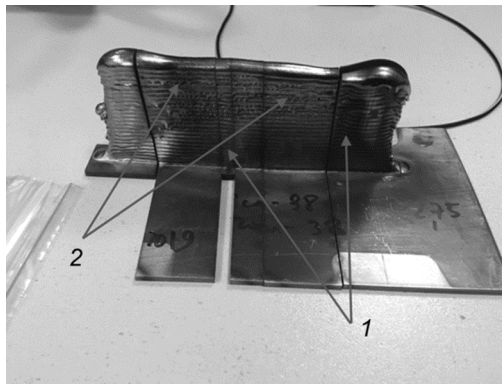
Photograph of electric discharge machining: 1 – metallographic specimen fabrication, 2 – dog bone specimen fabrication.
